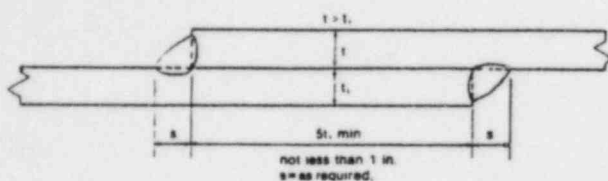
Double-fillet-welded lap joint.
